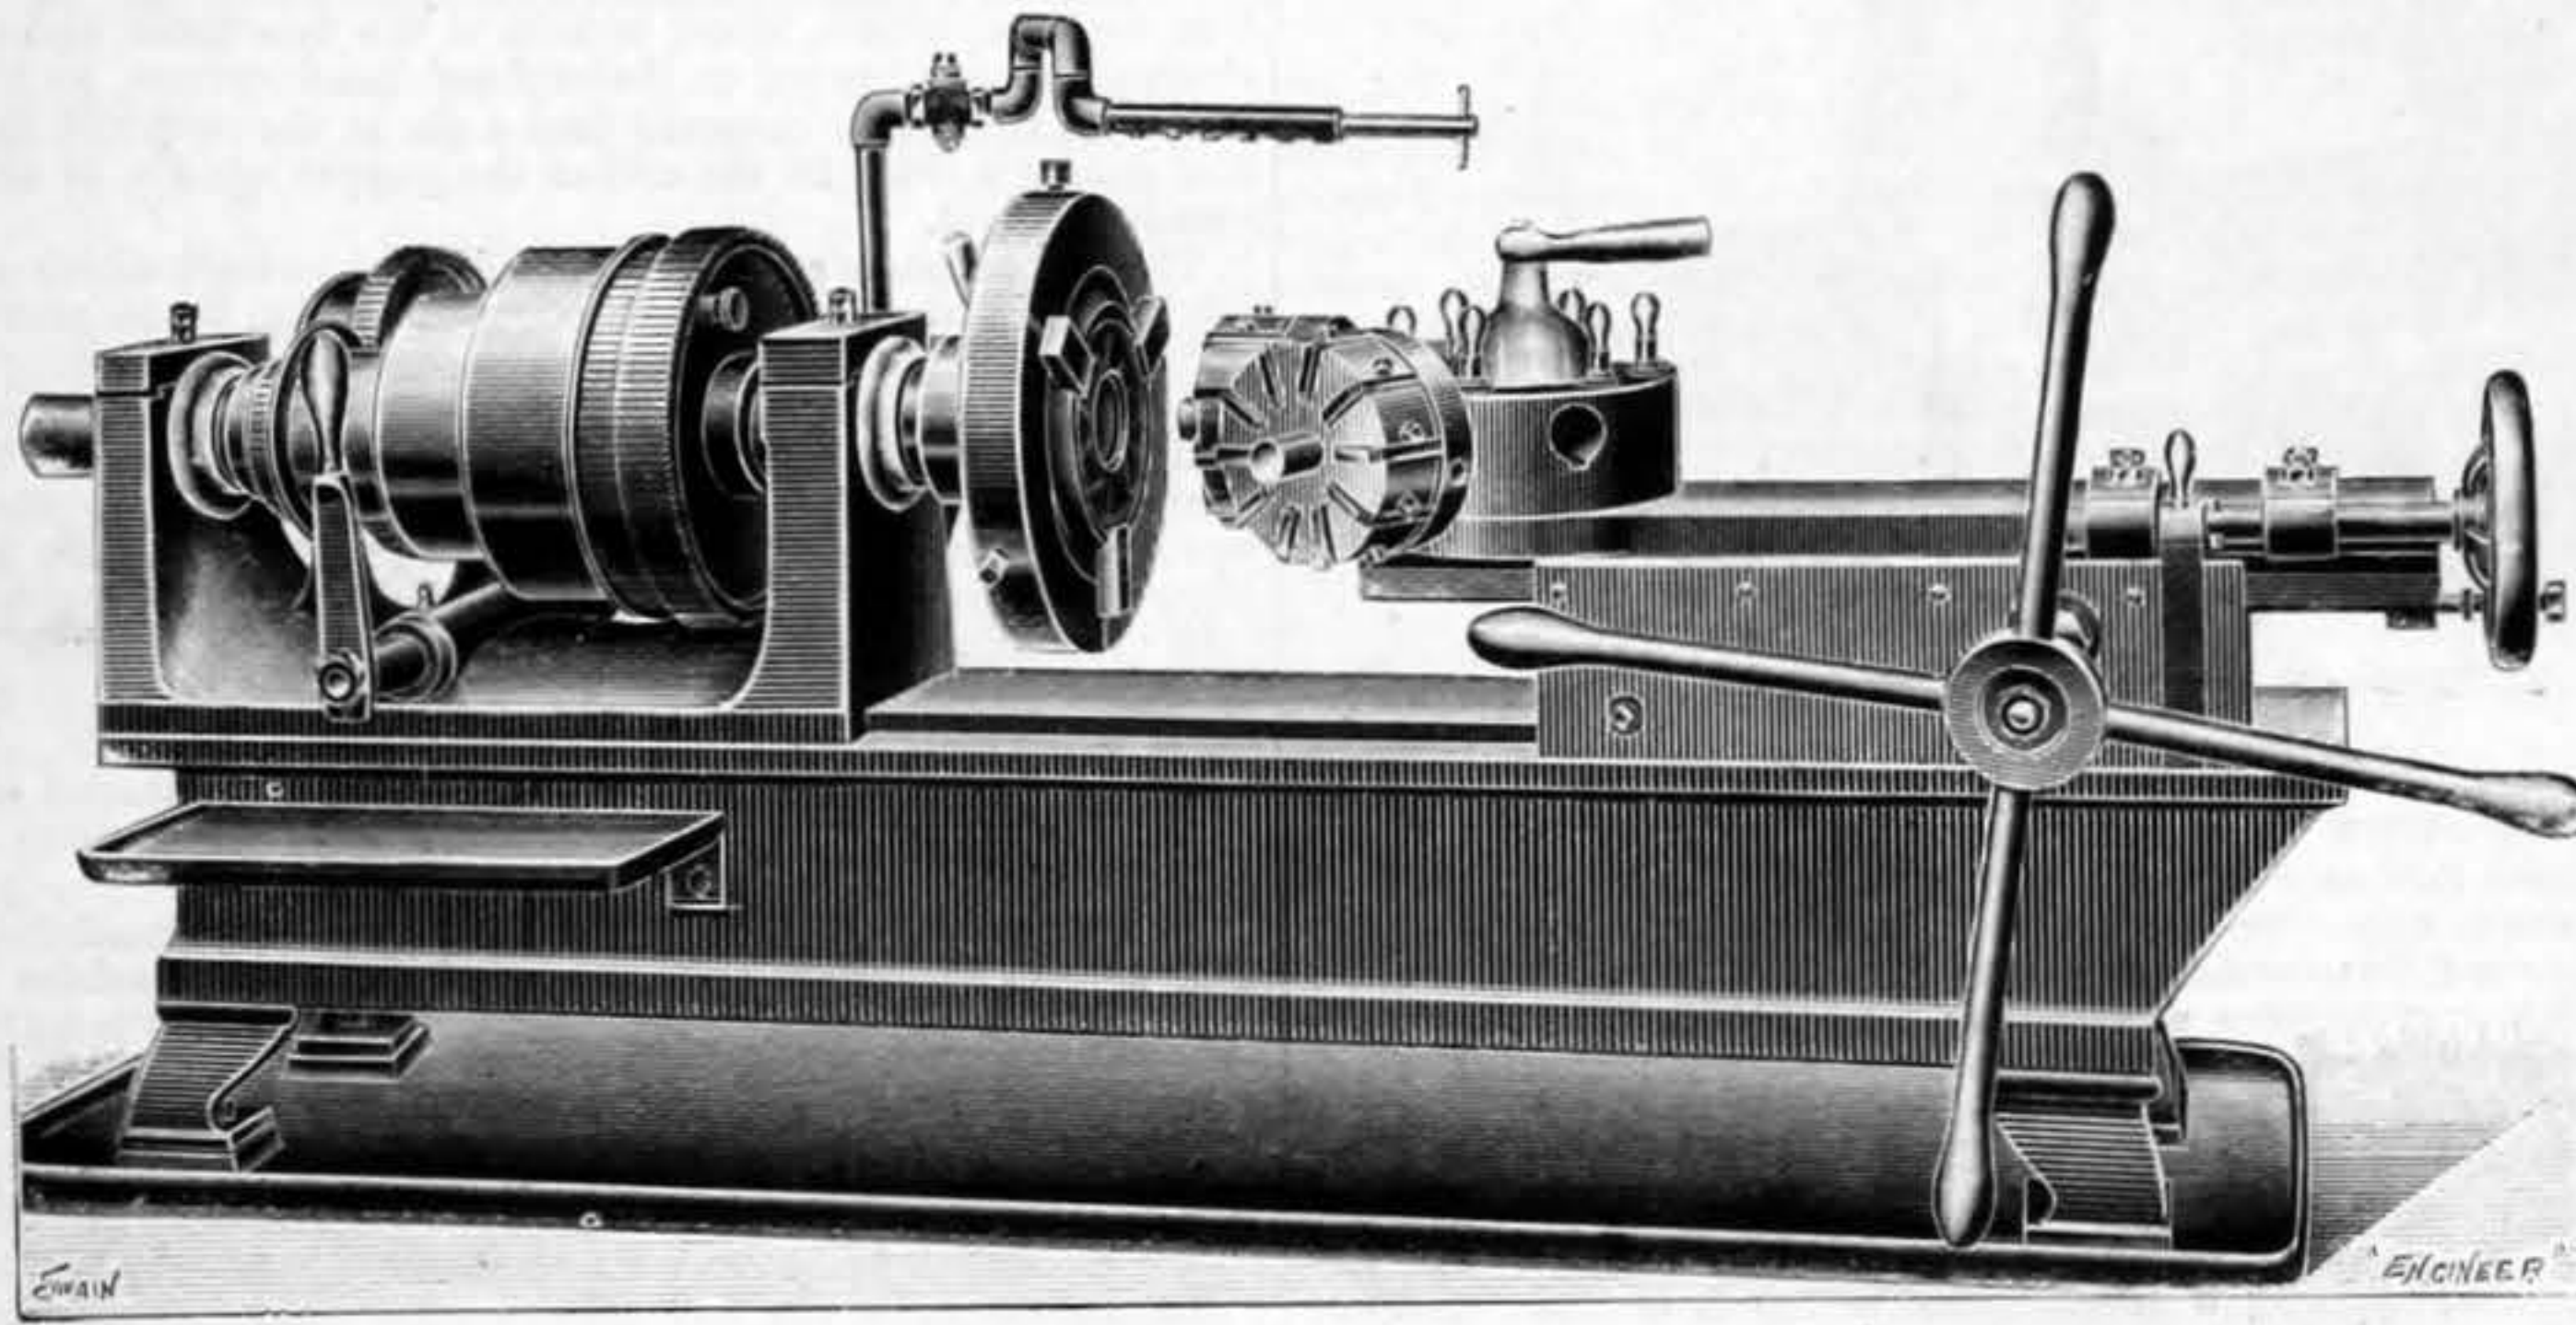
MESSRS. BUCK AND HICKMAN'S SPROCKET FACING MACHINE
